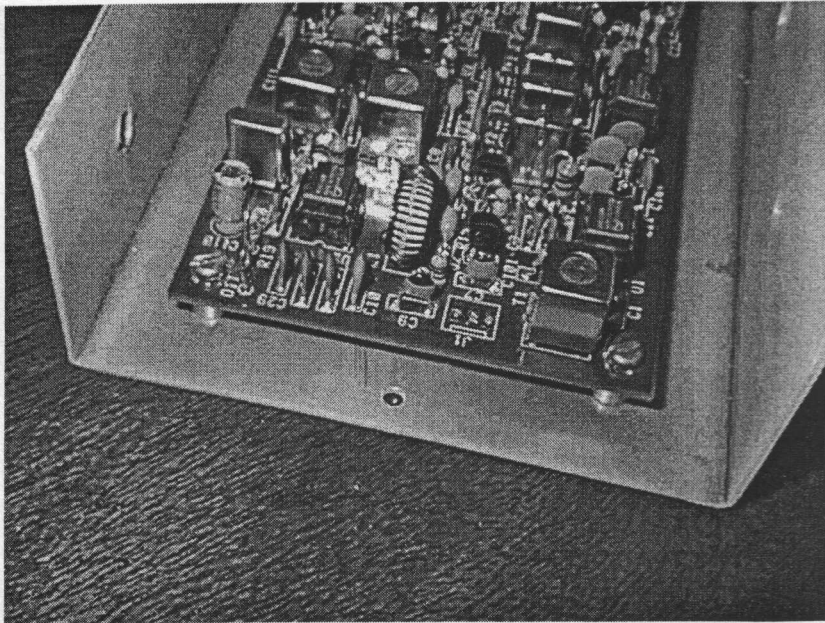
Case Bottom with PC Board Mounted on Standoffs.
